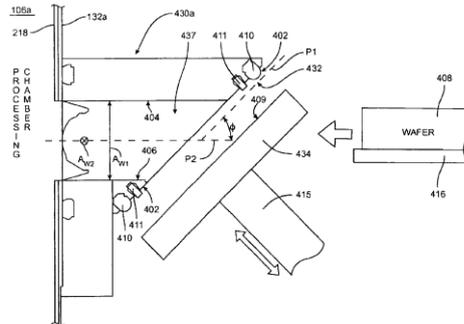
Wear-resistance design of slit-valve (US6764265 B2)
